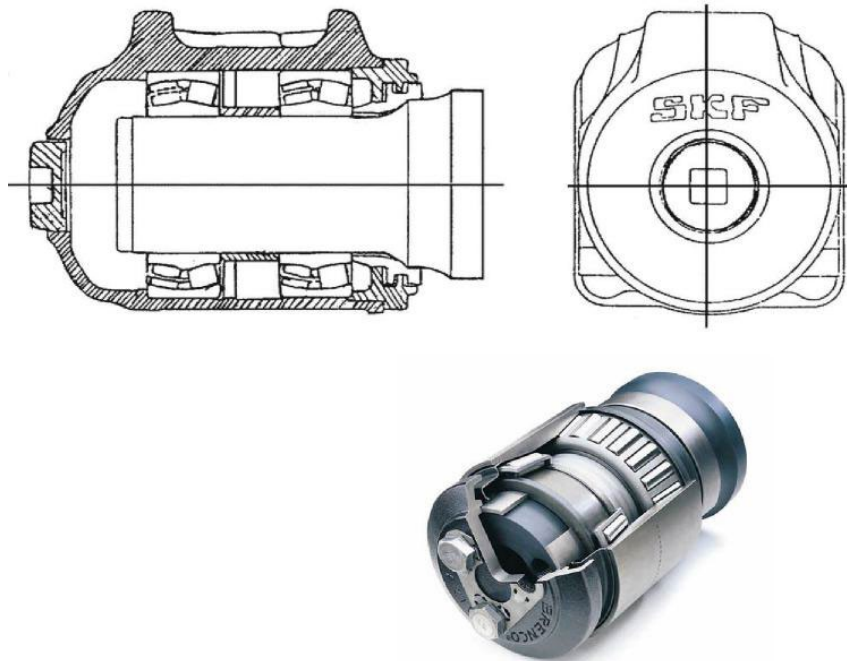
Axlebox bearing & Package unit roller bearings (example only)
